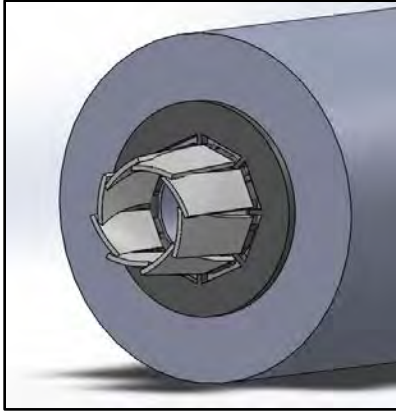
Standard nozzle flap placement of a conical nozzle. Flaps overlap, allowing them to fold much like a vegetable steamer.
